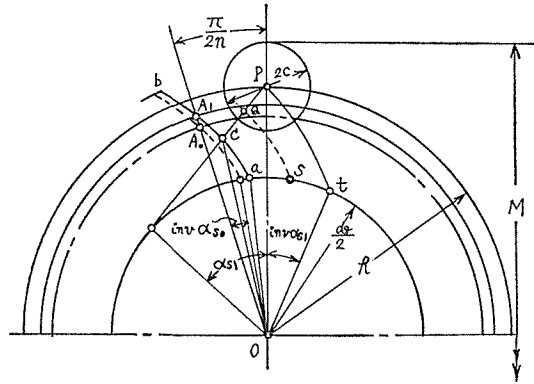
Measurement of pitch diameters of involute worm thread screws by the three-wire method
